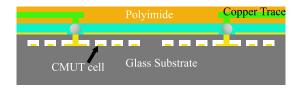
Schematic cross-section of the front-side FPCB interconnect
